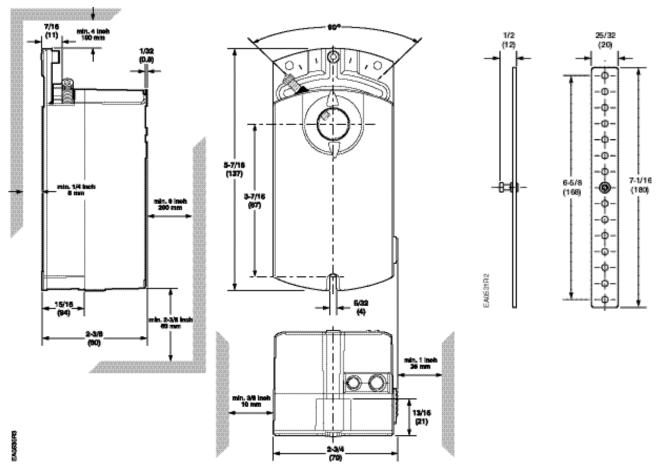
Dimensions of the OpenAir GDE Actuator and Mounting Bracket.
